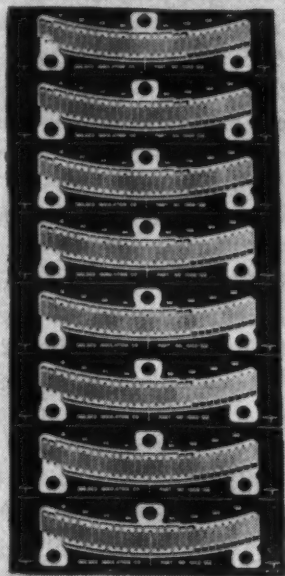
FLUSHING etched panels minimizes arc draw and edge wear if the circuit is a part of a sliding contact.
